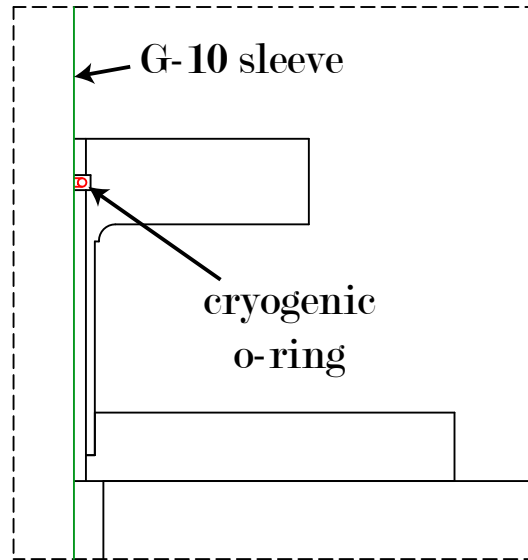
Detail view of the dilution refrigerator sliding seal showing the cryogenic o-ring mating to the outer sleeve of the dilution refrigerator.
